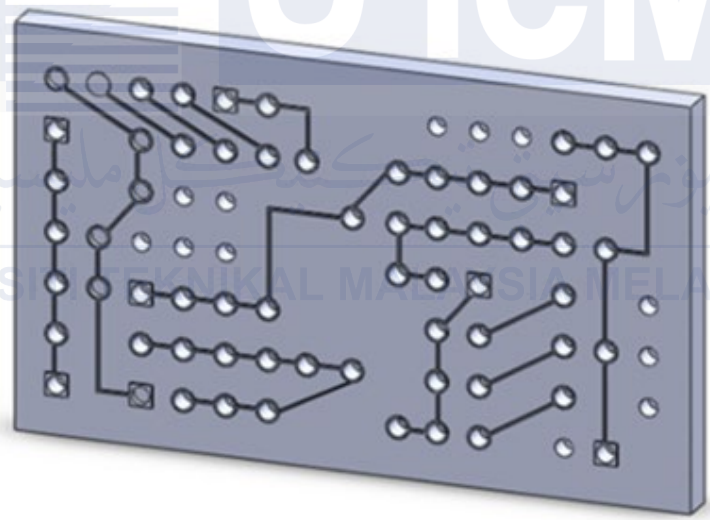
The 3-dimension PCB workpiece with 76 holes
